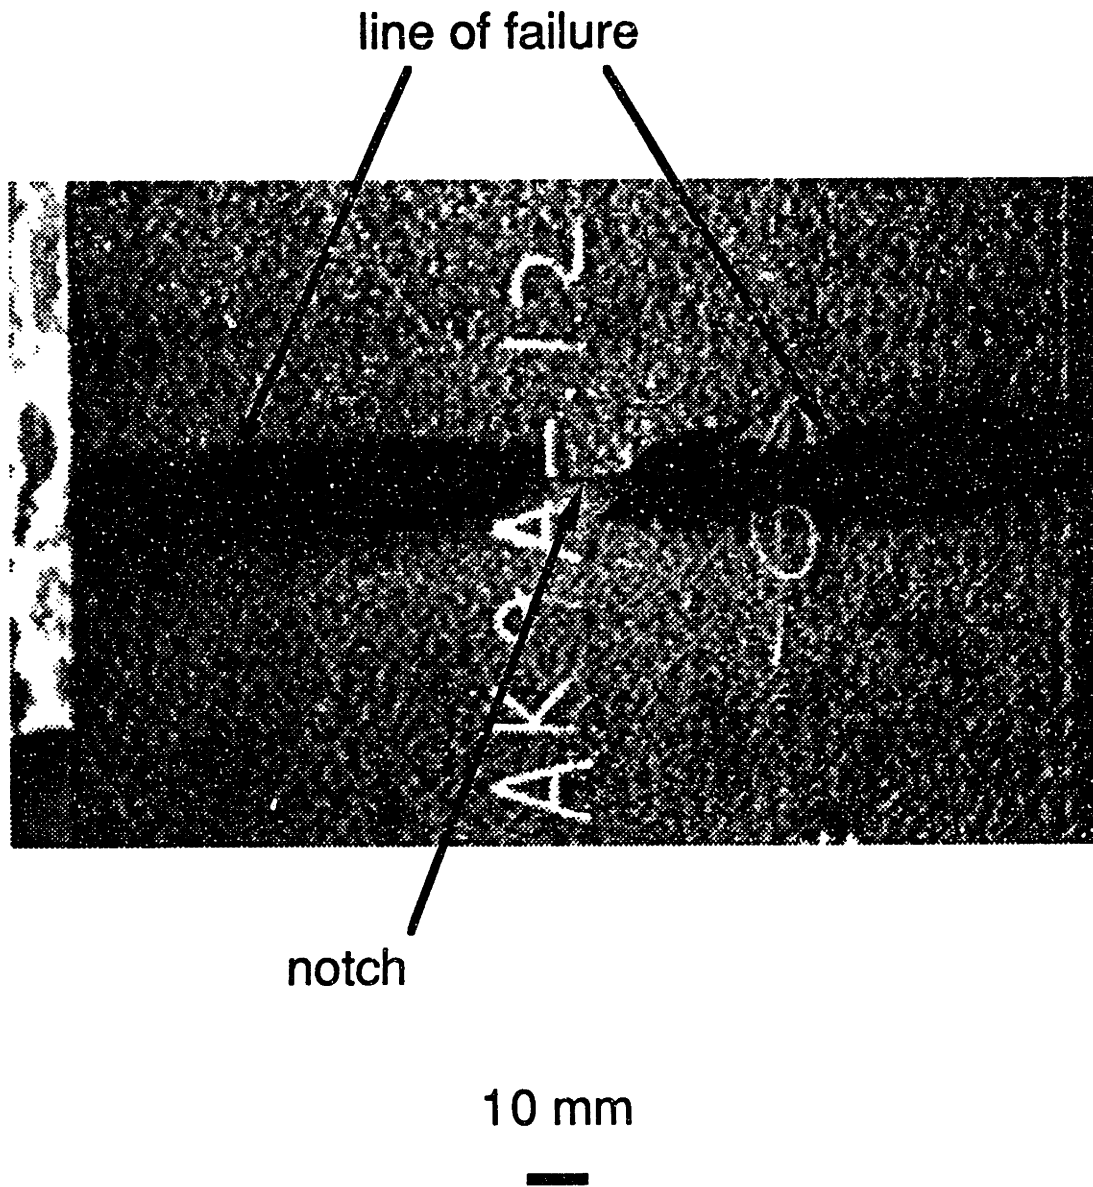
Side view photograph of a representative specimen in which only the notched facesheet failed (specimen A-S-SN13b).
